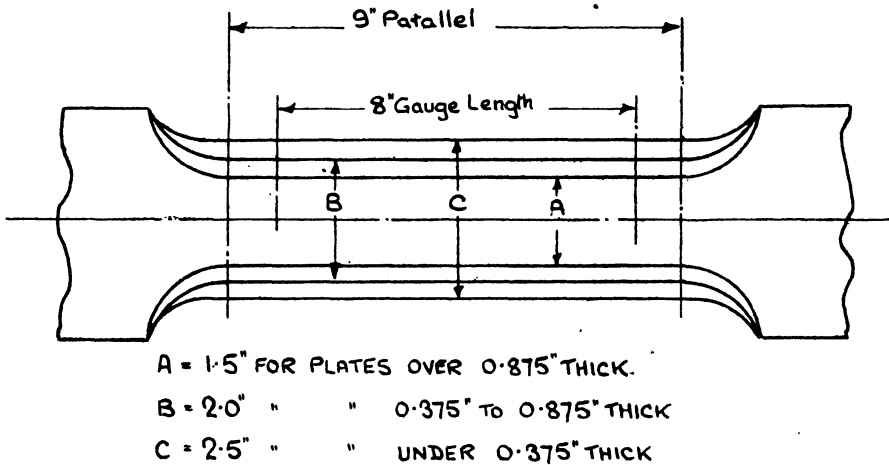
BRITISH STANDARD PLATE TEST PIECES
